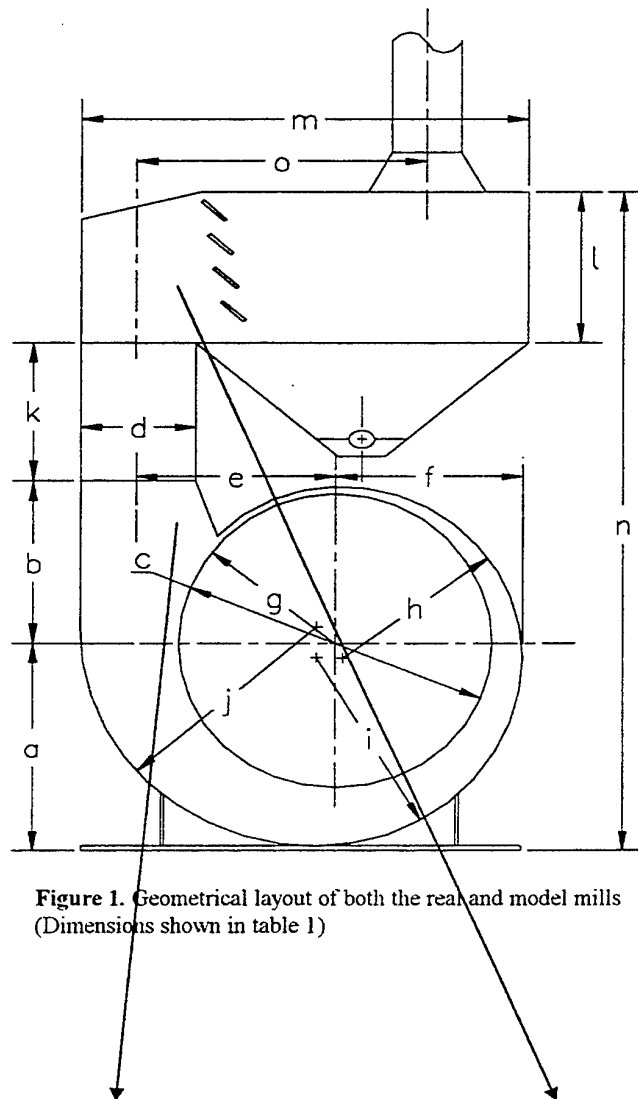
Geometrical layout of both the real and model mills (Dimensions shown in table 1)
